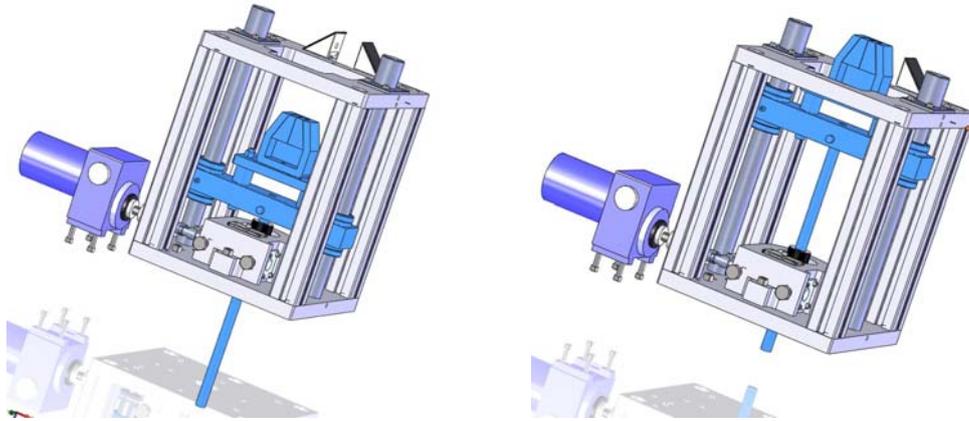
Worm wheel drive assembly (D080200) in situ
